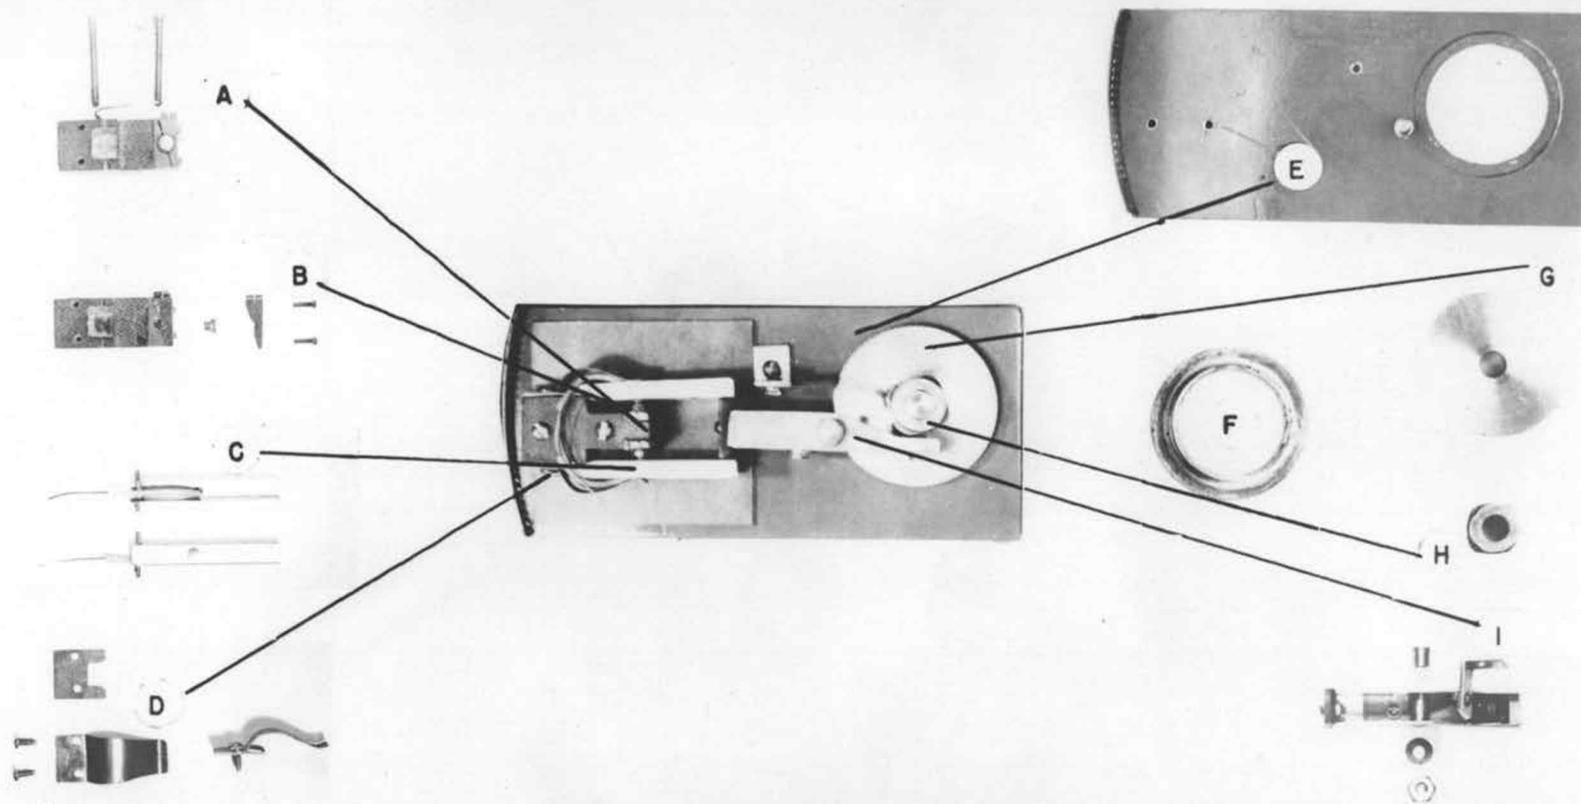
Layout of breaker assembly. A. Micarta mounting block and assembled set screw holder. B. Set screw and split set screw holder. C. Contact arms showing gold contact button. D. Contact arm retainer plate and spring. E. Variable side plate. F. The flanged brass bearing. G. Aluminum retaining screw. H. The cam.
